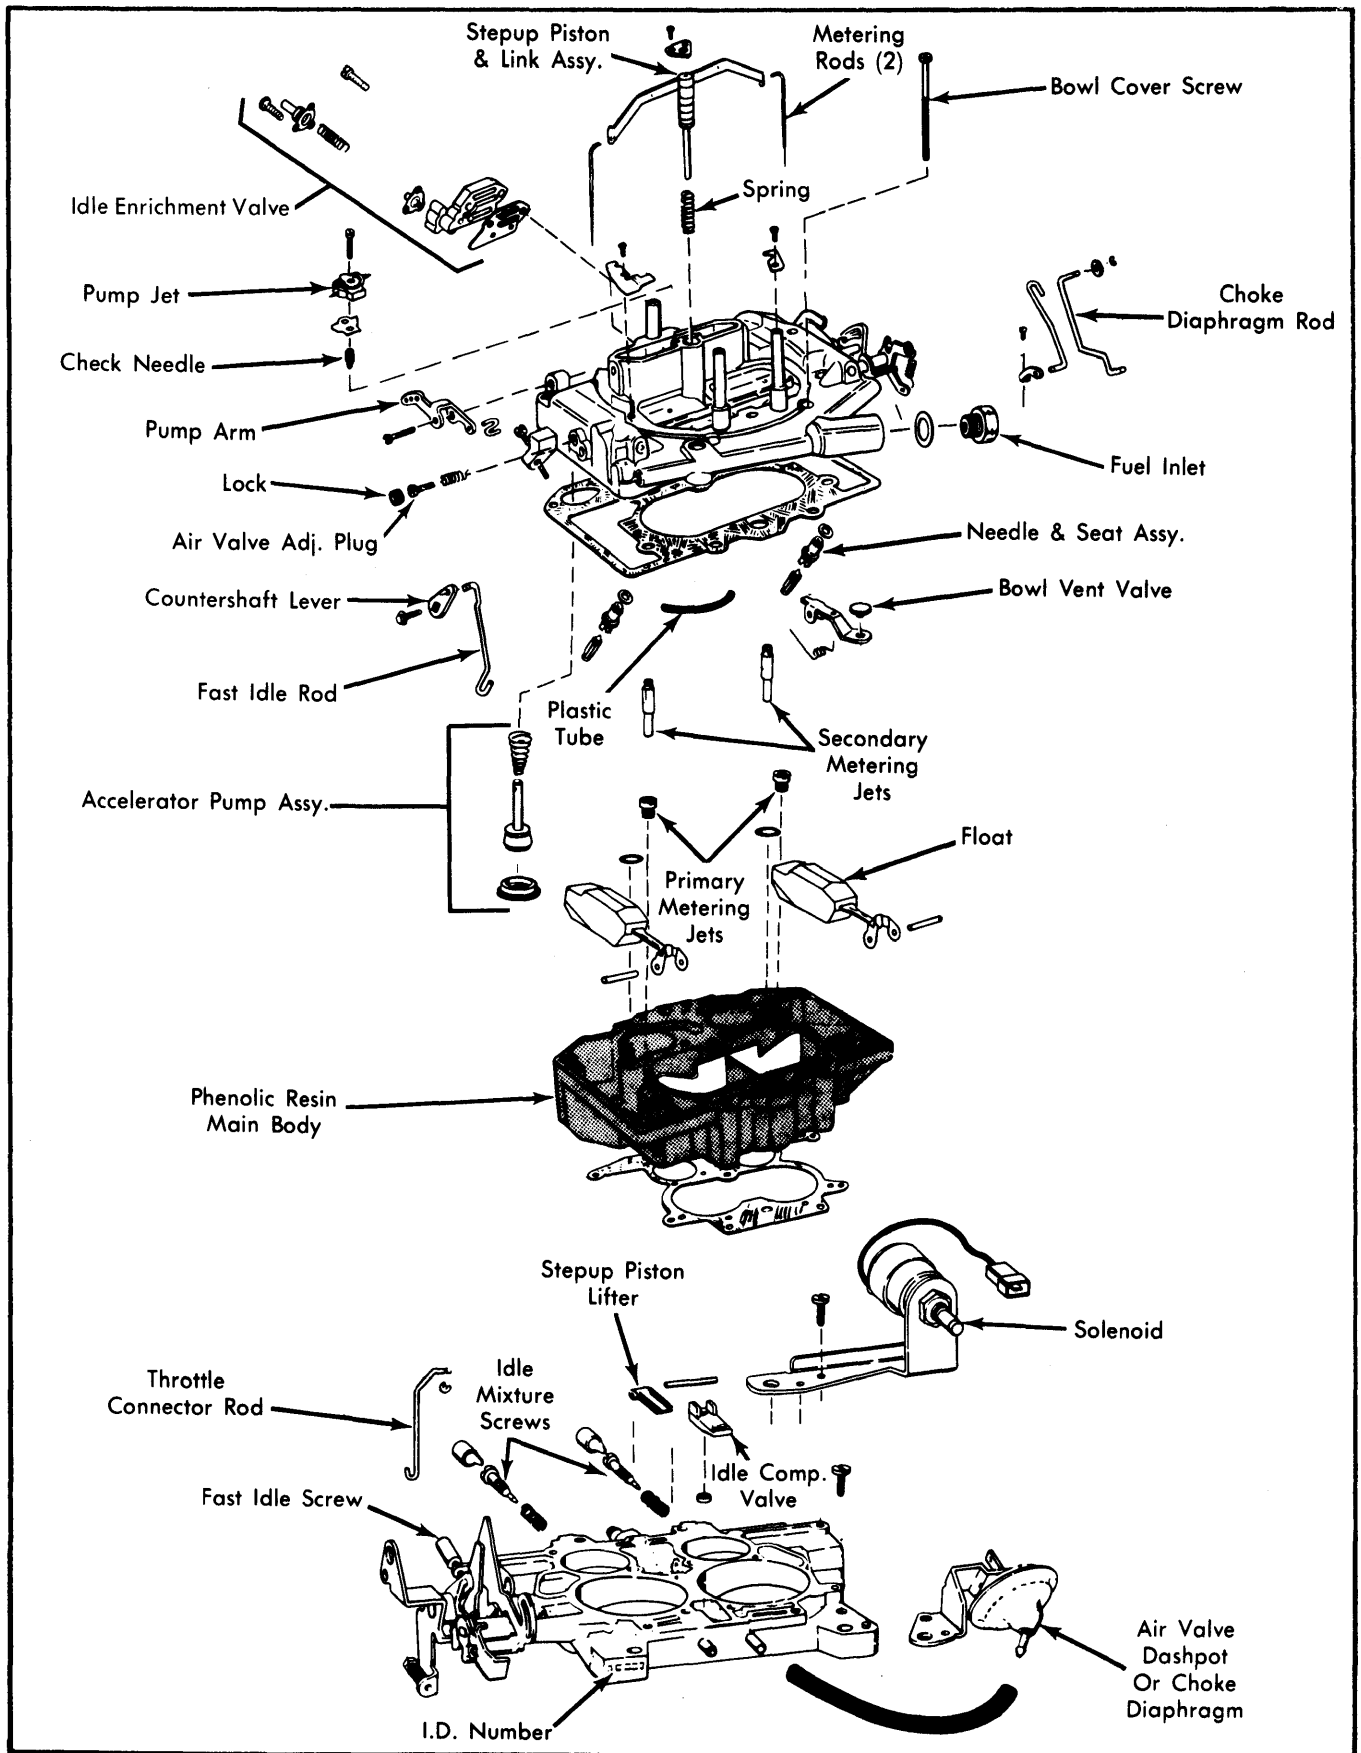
Exploded View of Carter Thermo-Quad 4-Barrel
